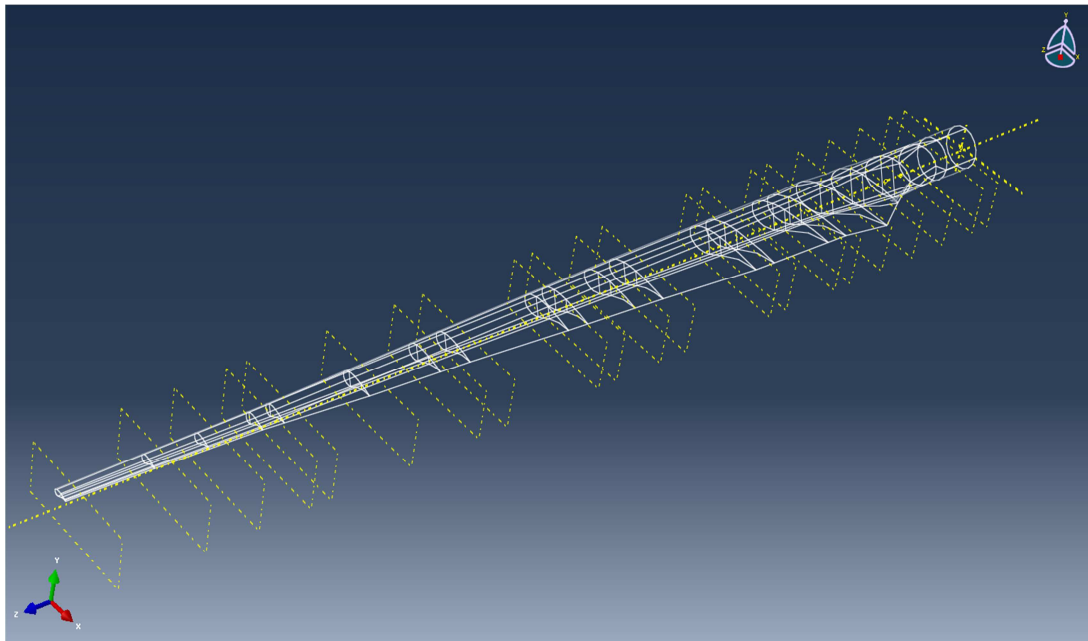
A 10m WTB illustrating sketches, datum planes and axes.
